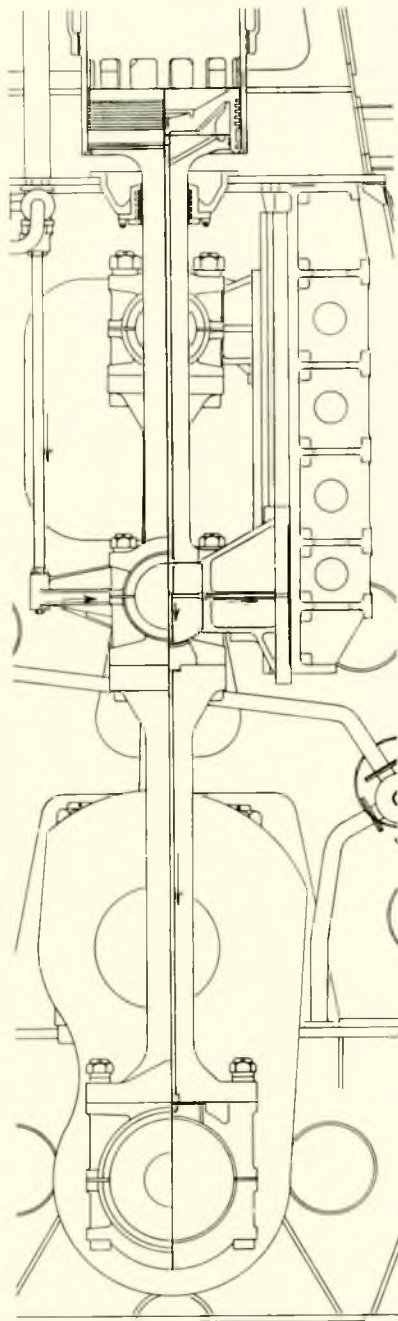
Lubricating oil circuit to the top and bottom end bearings
